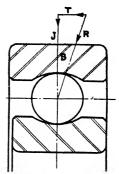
R. AND M. BEARING WITH LARGE THRUST CAPACITY
